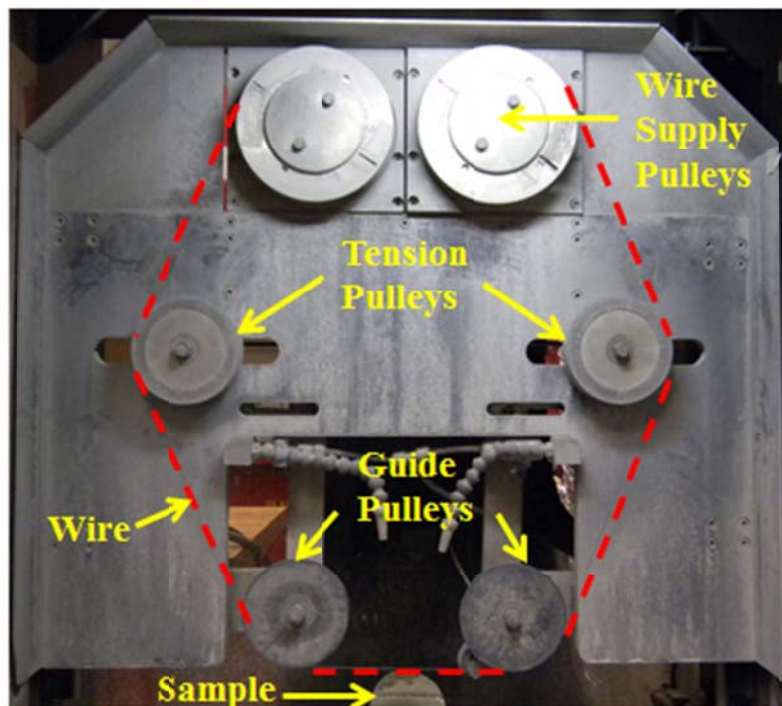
Single wire, spool-to-spool wire saw machine (DWT Inc., Millennium Model) used in wire saw tests. The wire is marked by the dashed line
